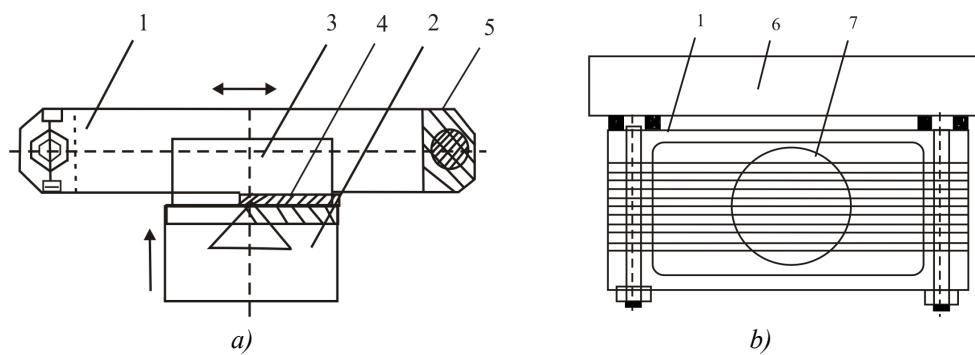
Replaceable frame coated with diamond grains: 1 – frame, 2 – table, 3 – TEM, 4 – gasket, 5 – spacer bars, 6 – carriage, 7 – wire coated with diamond grains.
